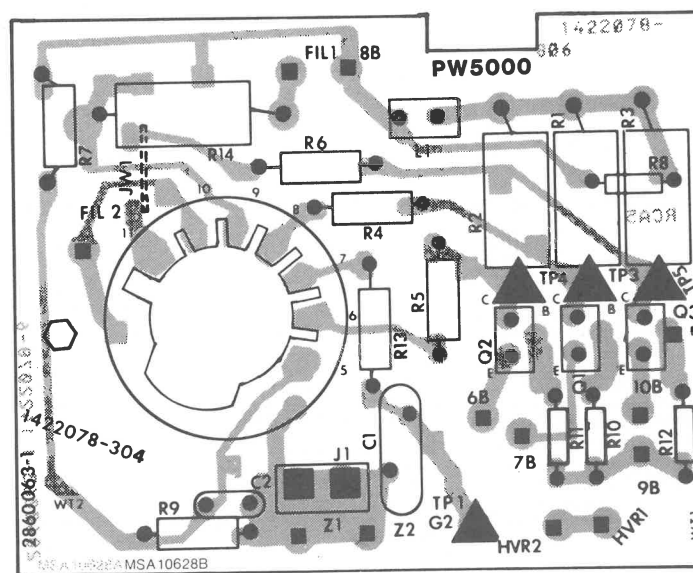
PW 5000 Kine Driver/Socket Circuit Board
